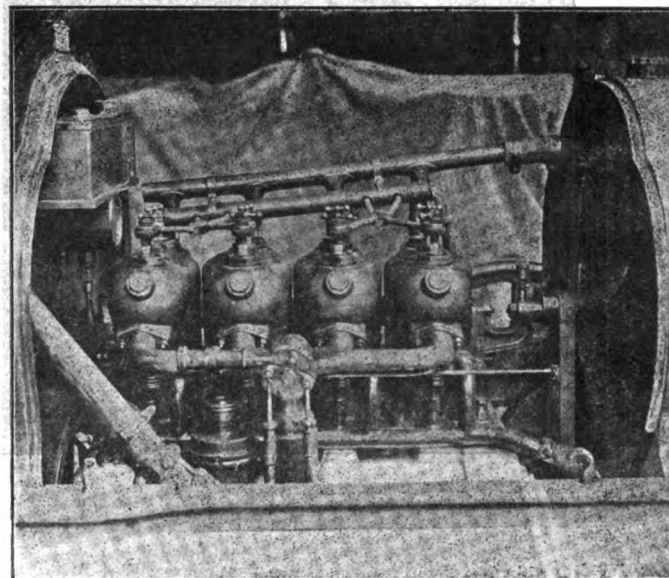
View of Inlet Side of Niclausse 15-h.p. Motor.
